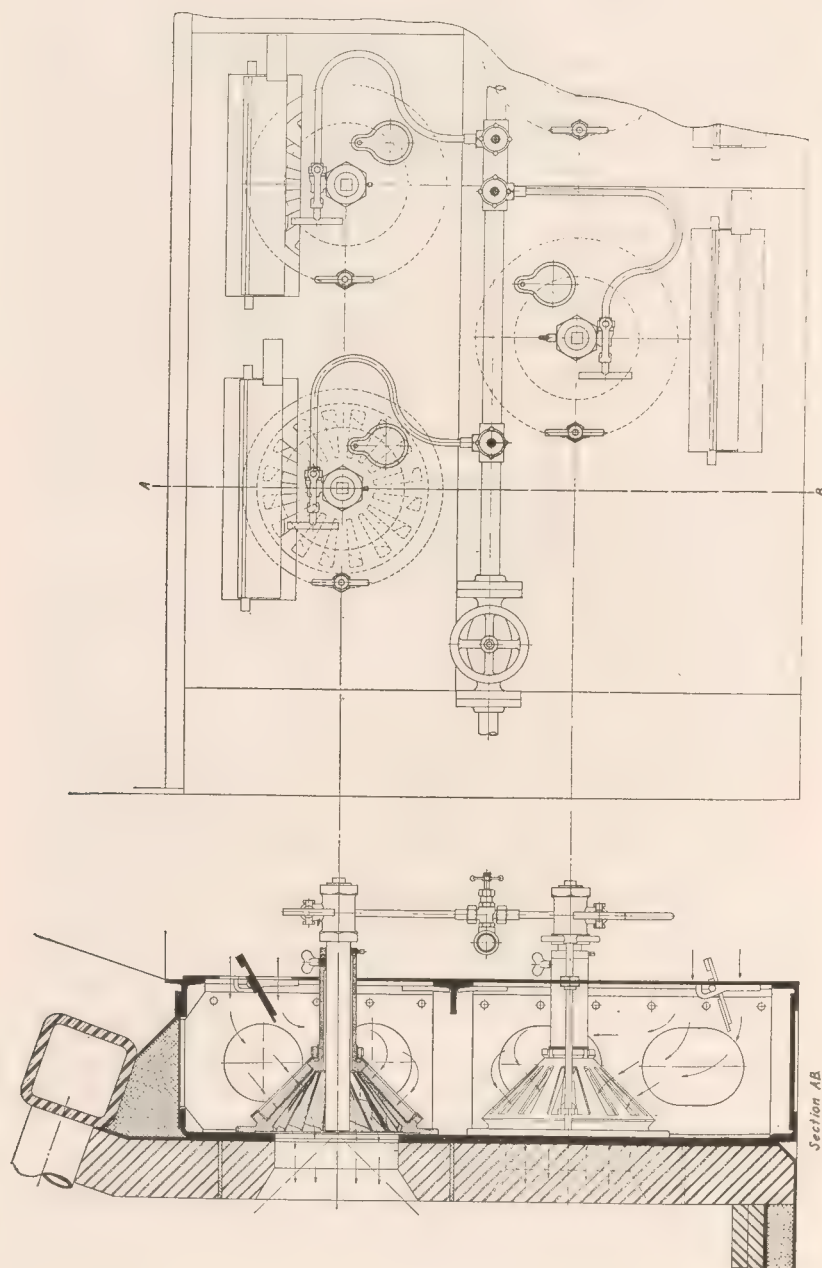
Bureau Air Control Fitted to Babcock & Wilcox Boiler with Double Front.
